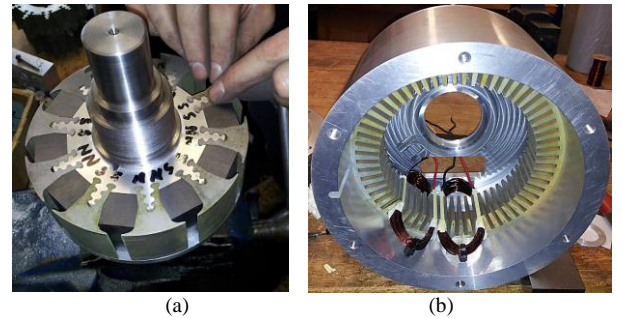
Simplified prototype motor. (a) Rotor and magnets, (b) Stator, coils and custom built housing without cooling.
